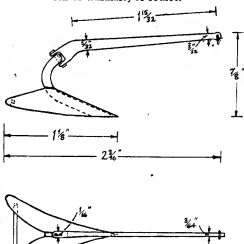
Plan and elevation of C.Q.R.-type anchor
